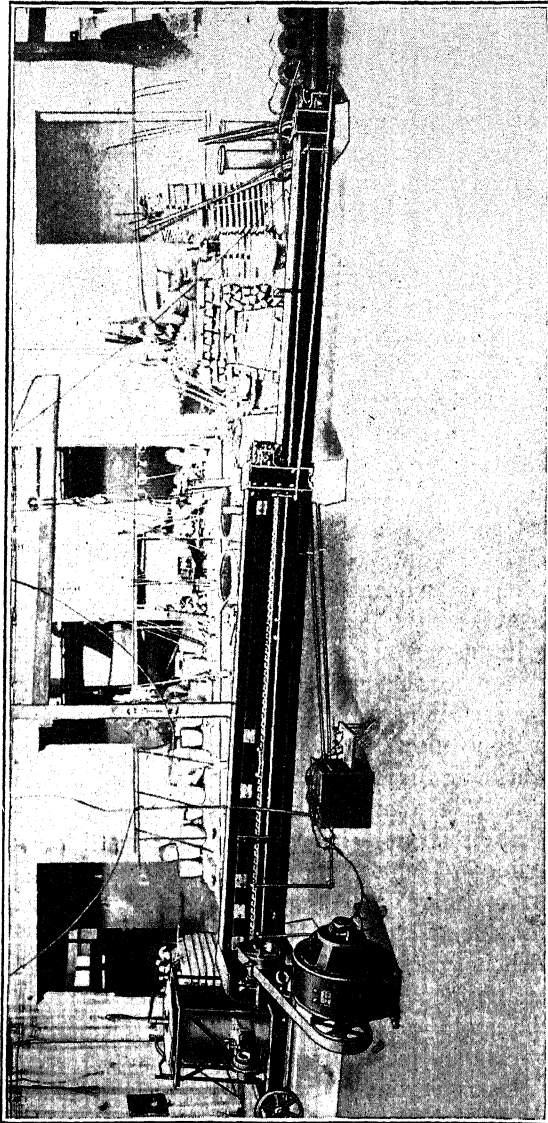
THE HORIZONTAL TYPE OF MELLEN ROD MACHINE FOR LEAD AND ALUMINUM.
